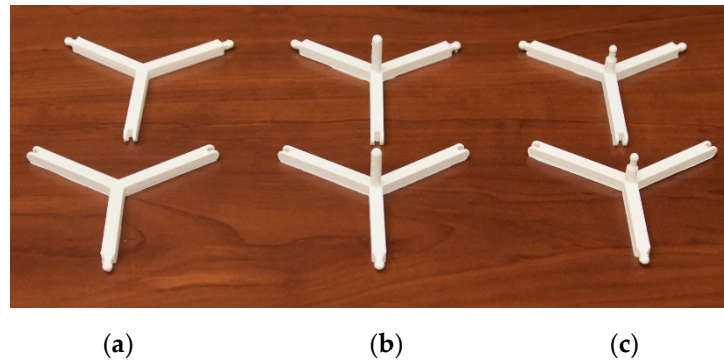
3D printed normal frame parts (a); parts with outstanding pillars (b); parts with outstanding pillar, with a sphere for a ball joint (c).
